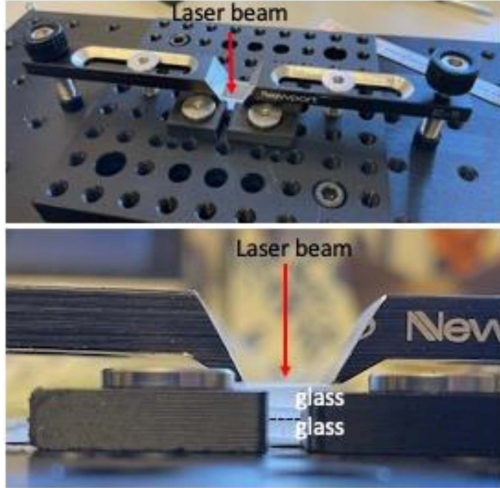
Image of jig used to press two pieces of glass together during the laser welding process.
